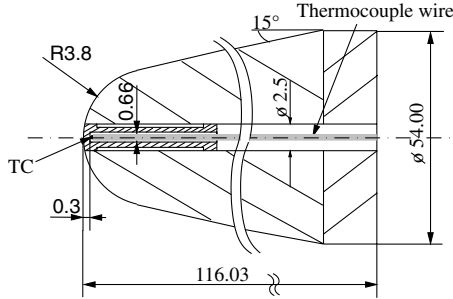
Sectional view and dimensions (in millimeters) of the probe.
